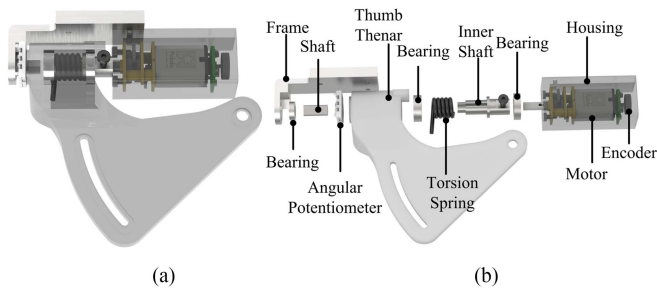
Design of RSEA for thumb thenar: (a) perspective view of the RSEA; (b) exploded view of the RSEA.
